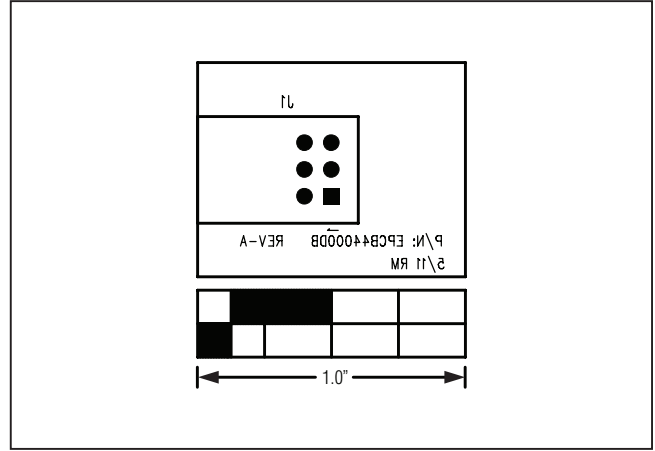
MAX44000 Daughter Board Component Placement Guide—Bottom Side
